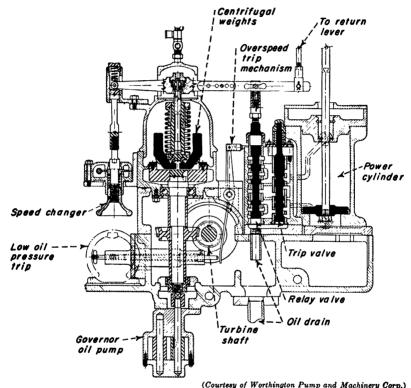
Single oil relay mechanical-hydraulic governor.
